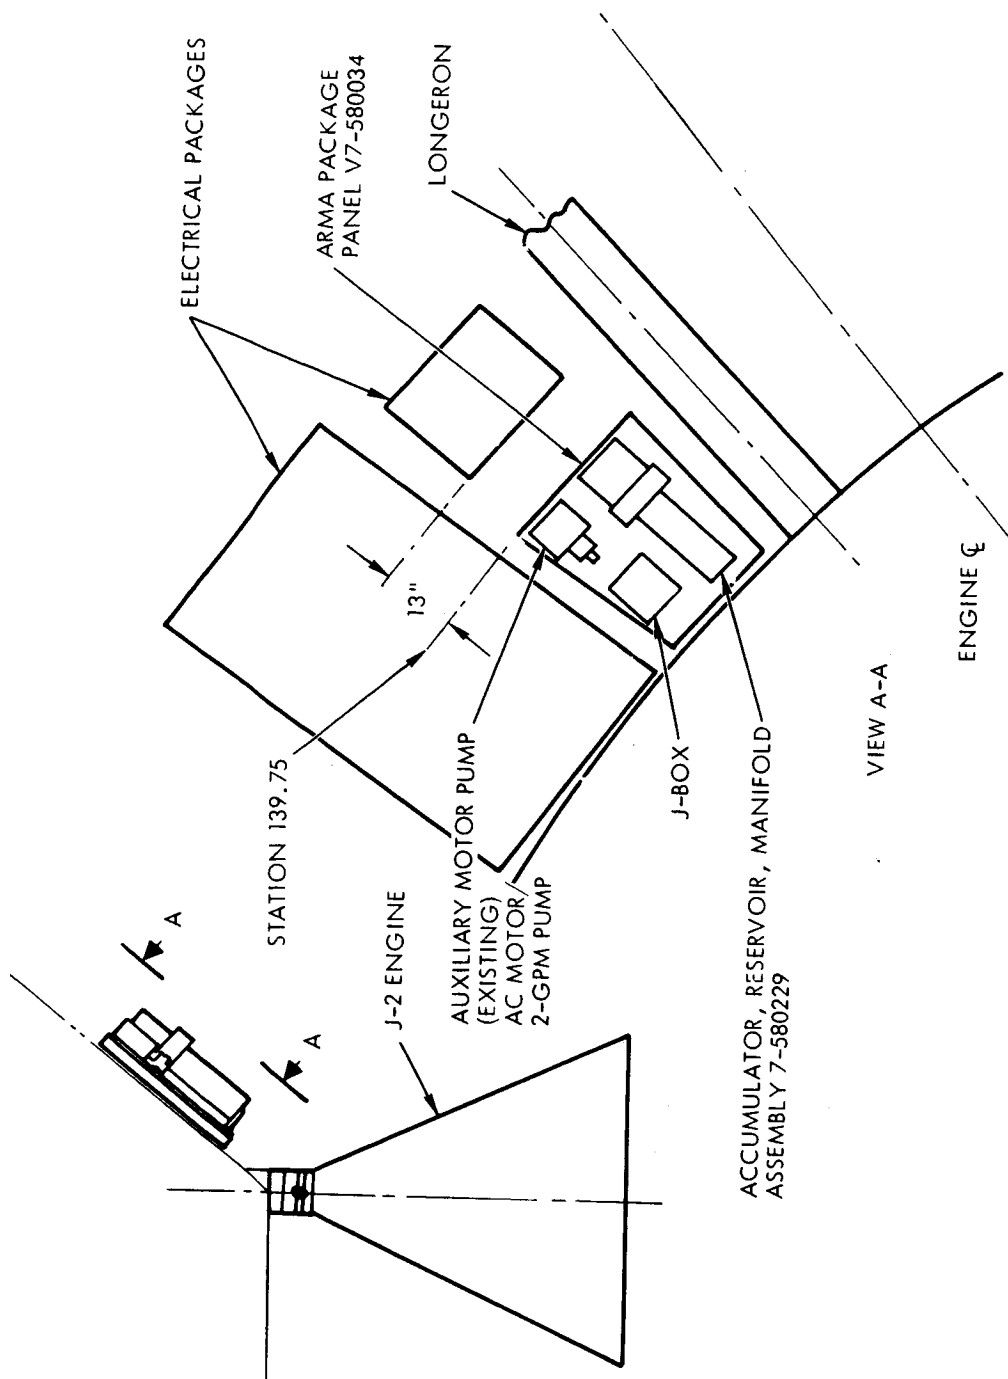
2-85. Accumulator Reservoir Manifold Assembly and Auxiliary Motor Pump Location
